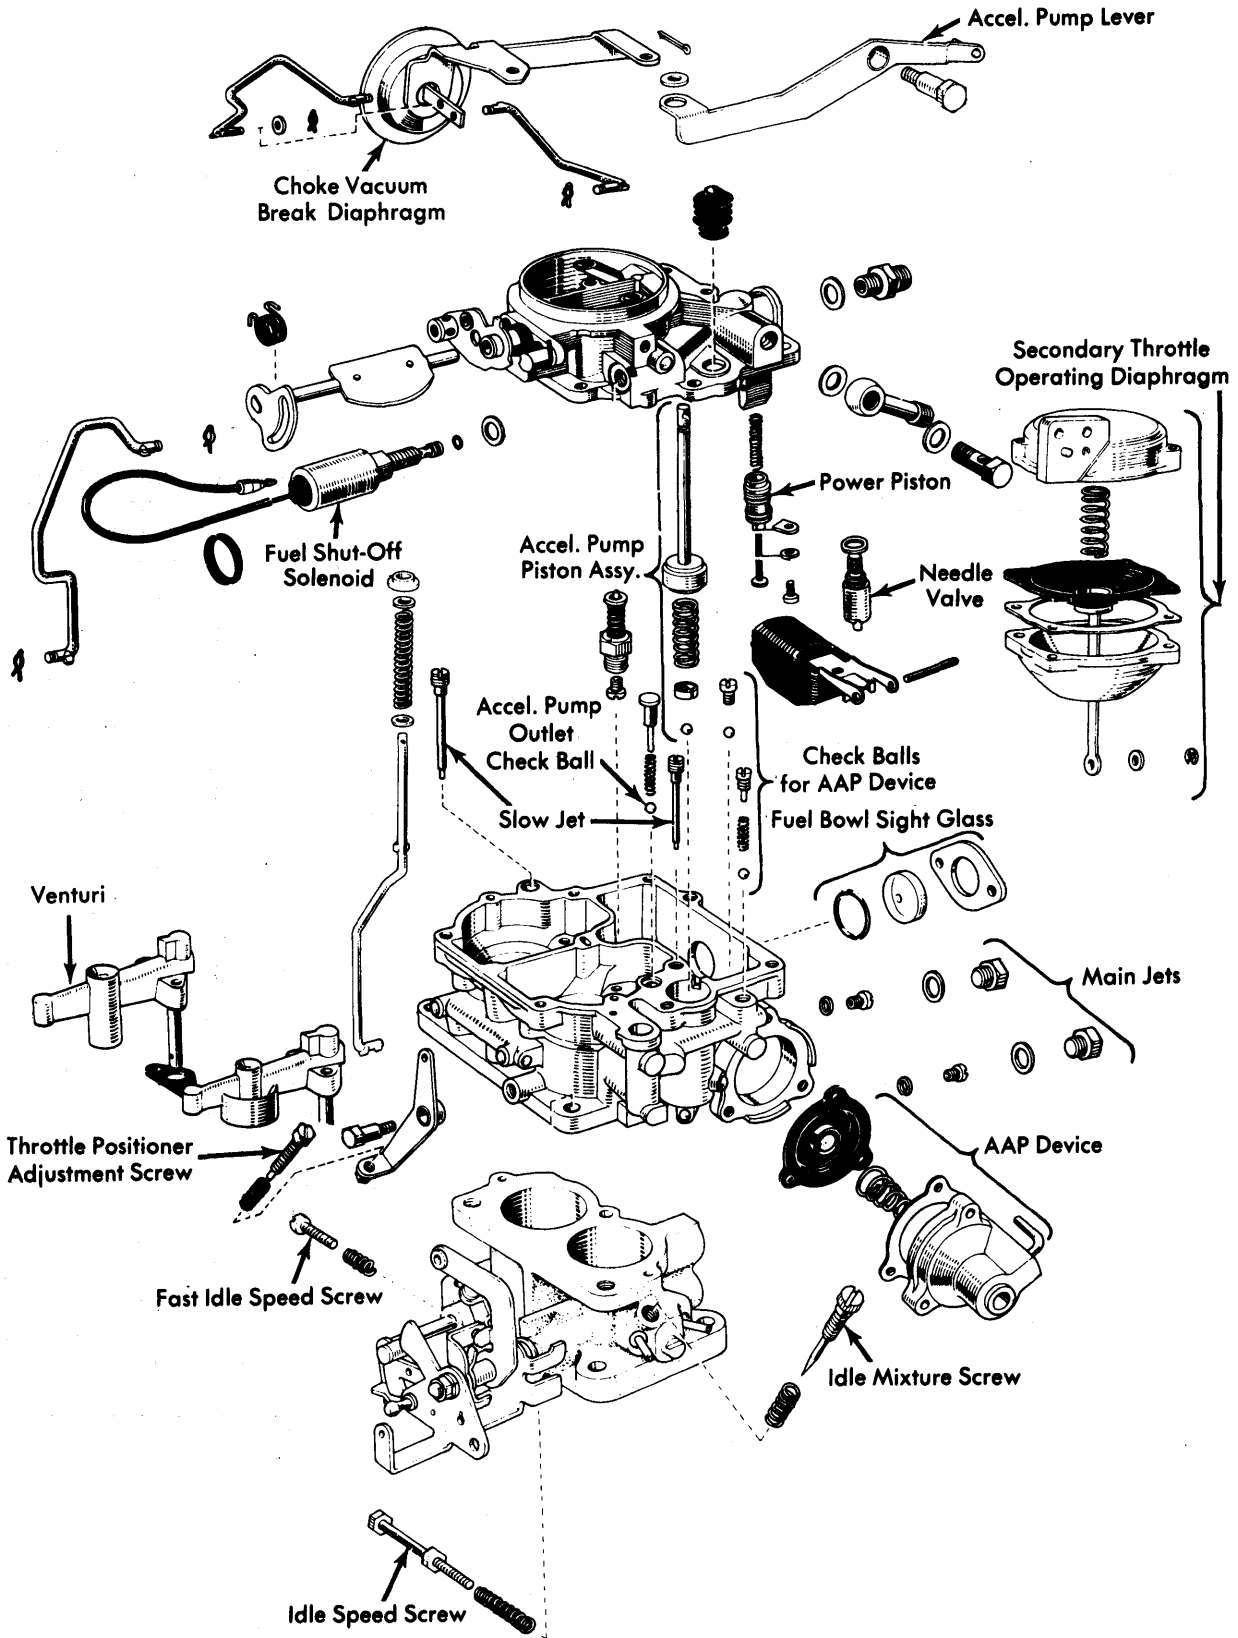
Exploded View of Aisan 2-Barrel Carburetor (Toyota 2F Engine)
